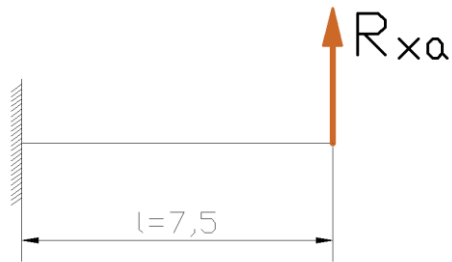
The load scheme of the pin on the walls of the rail and bracket.
